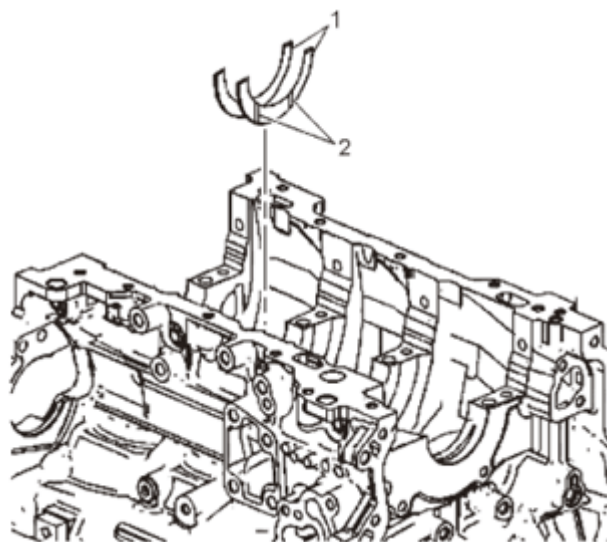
Identifying Main Bearings And Cylinder Block
